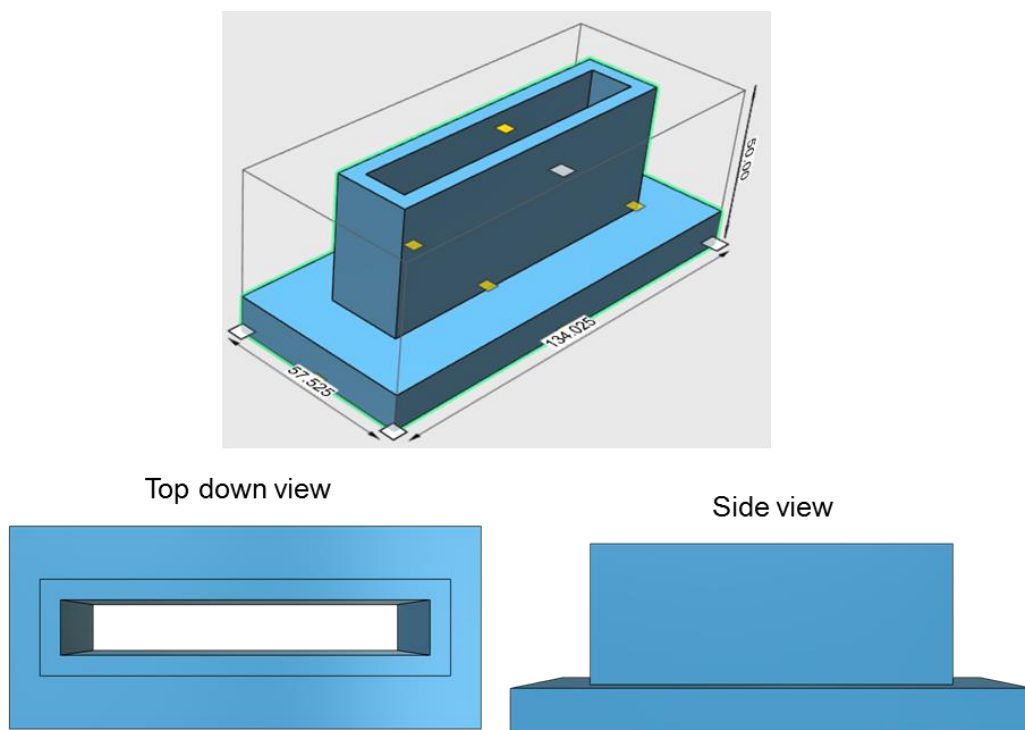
3D model used to print the larger scale reactor. Dimensions are in mm.
